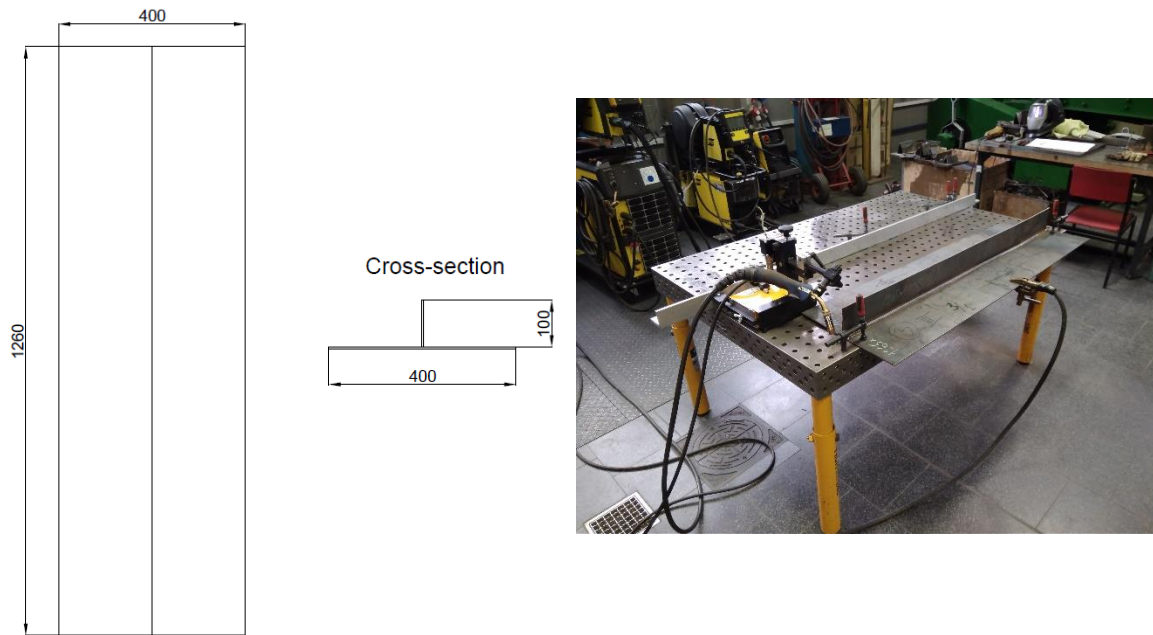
Specimens dimensions (left) and welding process (right).
